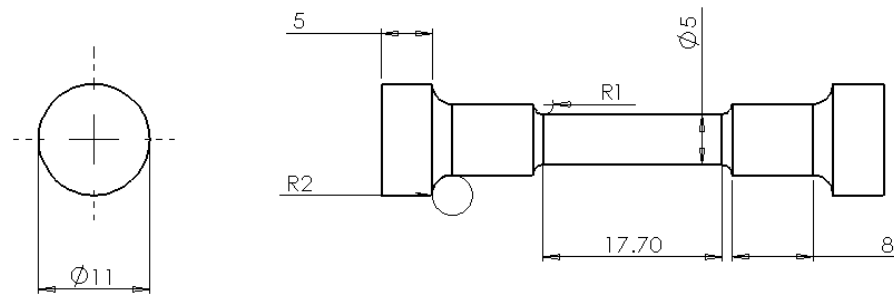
Cad drawing of the tensile test part used in the static casting trials
